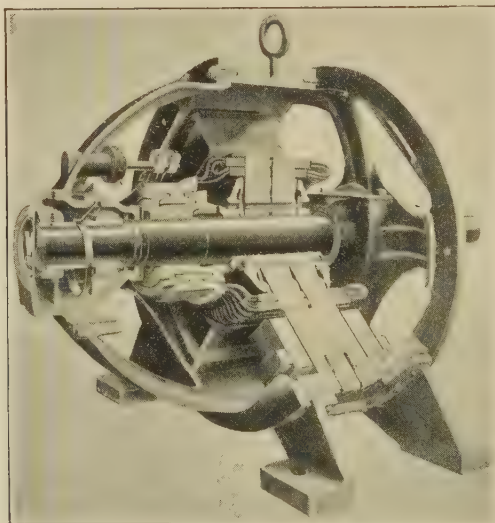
,—SK motor assembly. (Courtesy Westinghouse Electric & Mfg. Co.)
